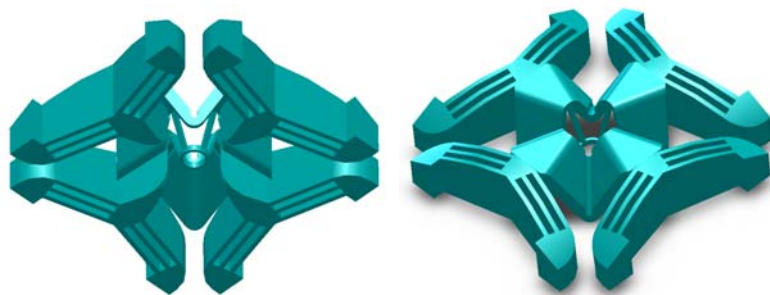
CAD drawing of a unit cell with an attachment mechanism inside the middle hole of the unit cell
